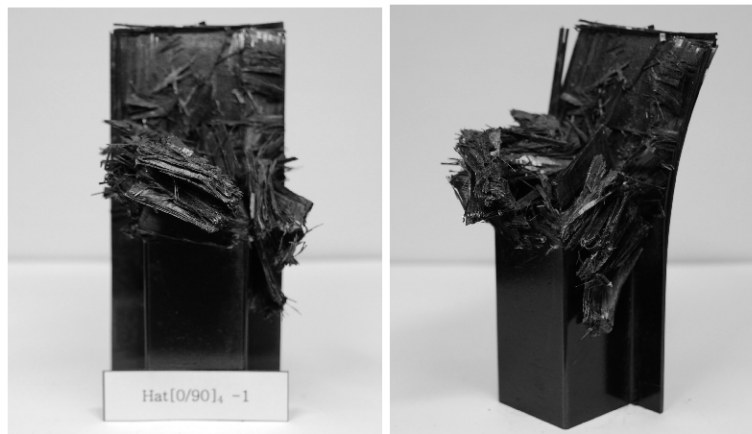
Shape of collapsed CFRP side member. $[0/90]_4$
